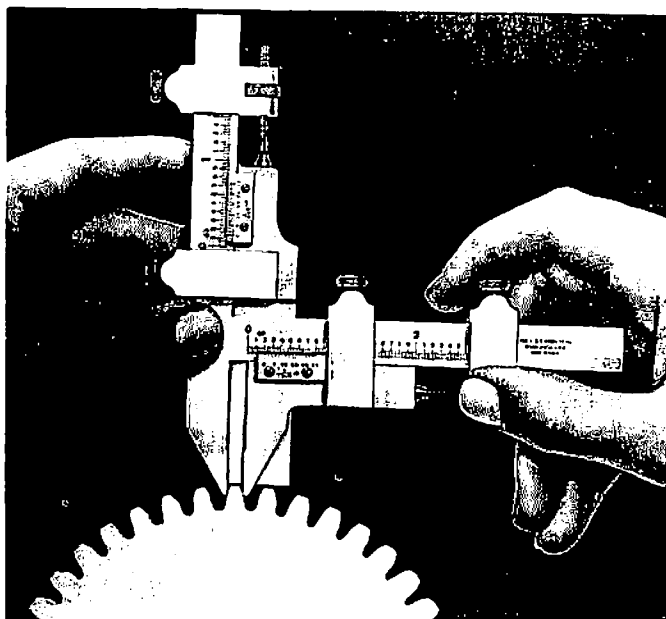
Using a gear tooth caliper (Courtesy L. S. Starrett Co.)
